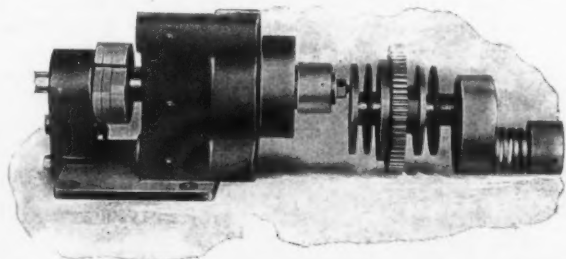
The Friction Stop Disk Assembled and Unassembled.
